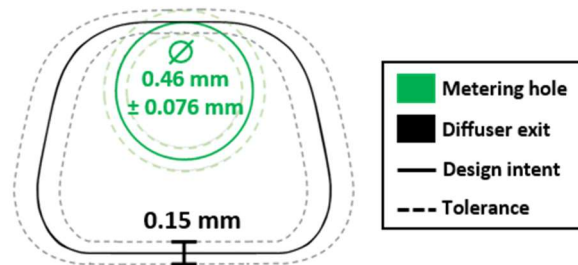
Film cooling hole tolerances for the metering section and diffuser exit profile looking directly into the hole.
